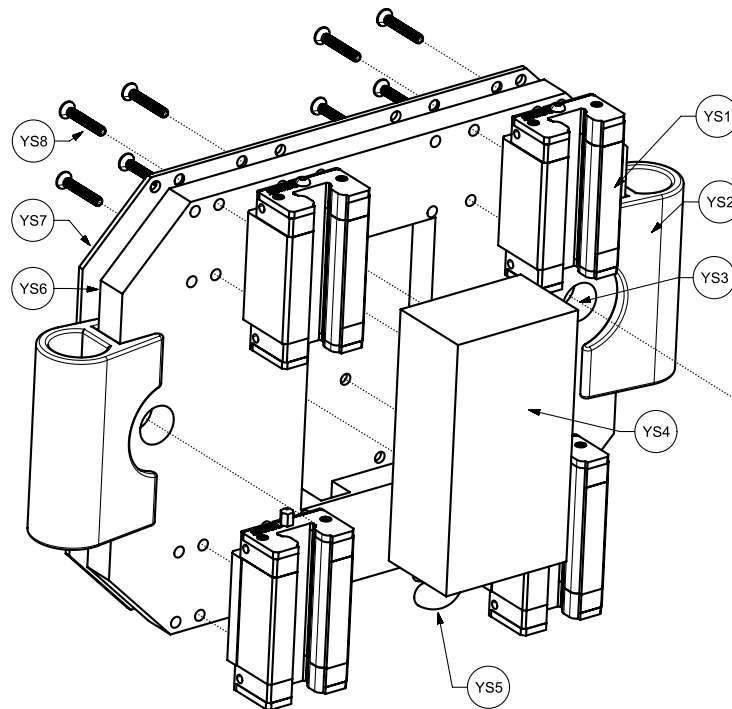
Exploded view of the front of the non-moving part of the y-stage (YS) with: linear carriage (YS1), bumper (YS2), weight-compensation mechanism mounting hole (YS3), coil-unit (YS4), cable of coil-unit (YS5), honeycomb panel (YS6), actuator mounting sheet (YS7), and machine screw (YS8).
